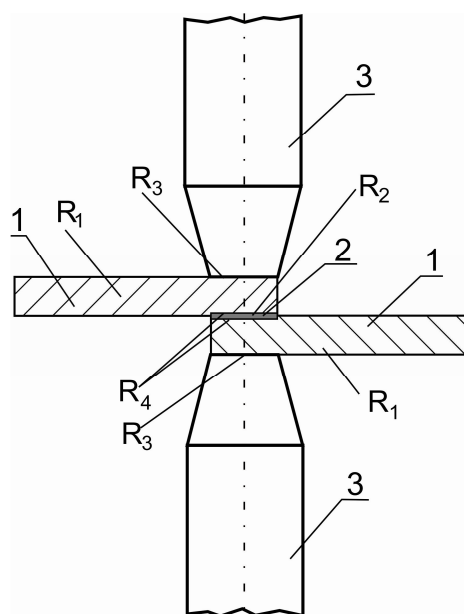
Schematic of the electric resistance spot brazing: 1 – brazed parts, 2 – solder, 3 – electrodes
